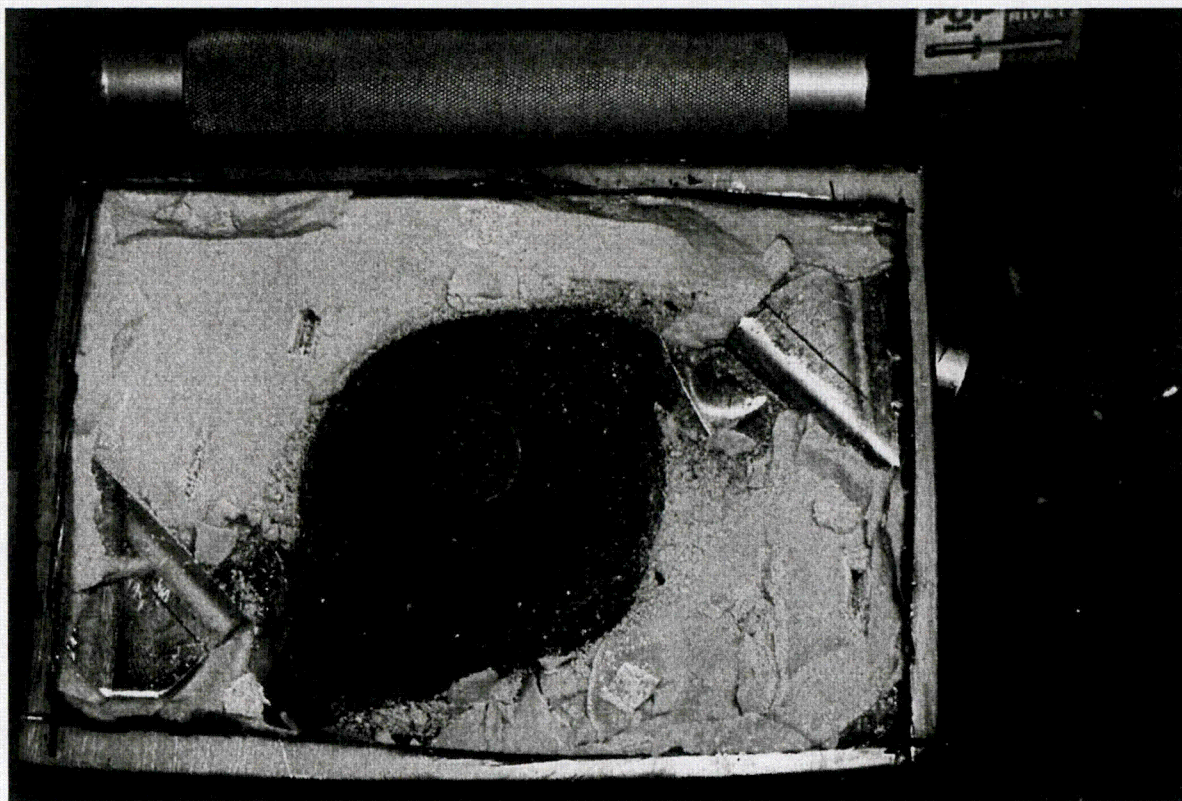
CTU-1 Post-Test Disassembly; View of DU Shield/Support Brackets
